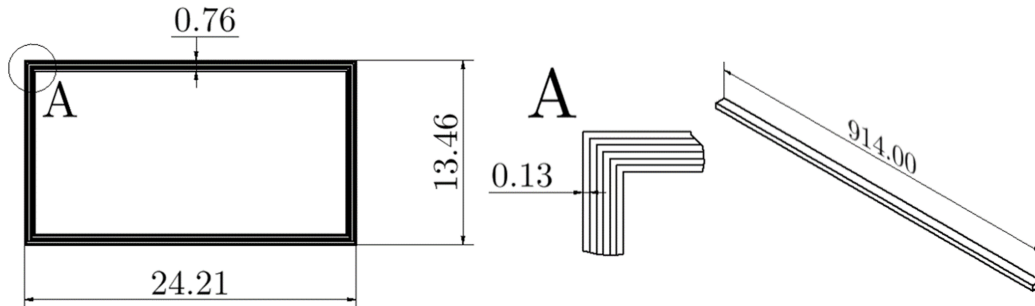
Chandra test bench for the structural model. The test bench is a carbon fiber laminated box section clamped on one end.
